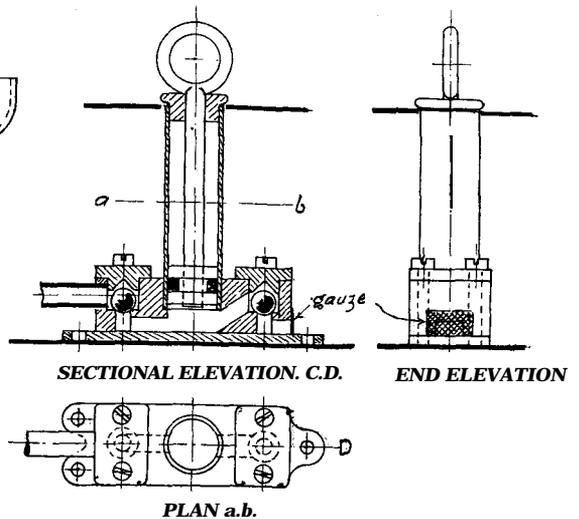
HAND-PUMP FOR FEEDING WATER TO BOILER. (Half full size.)
